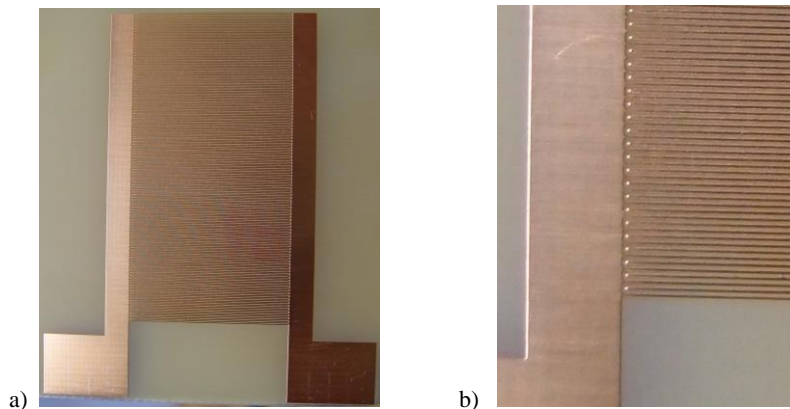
a) Deposition plate made by PCB technique; b) detail of interdigitated electrodes.
